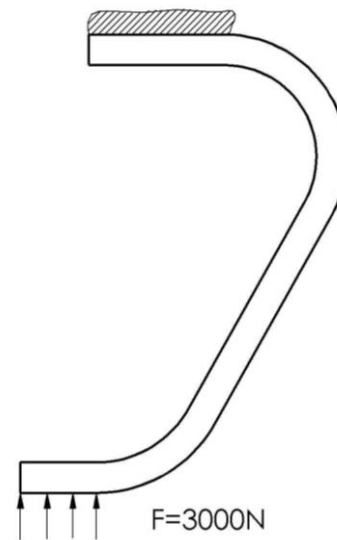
Loads and fixtures – CAD model without metamaterials.
